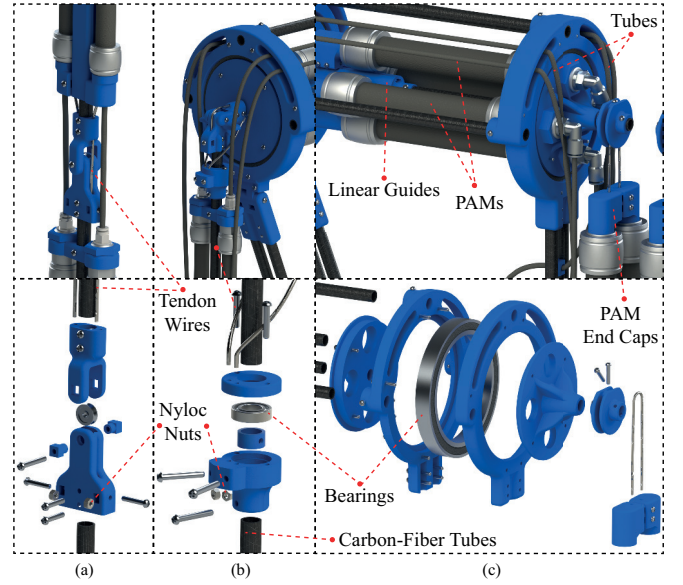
Design details in assembled (top) and exploded view (bottom) for the (a) elbow and (b-c) shoulder joints.
